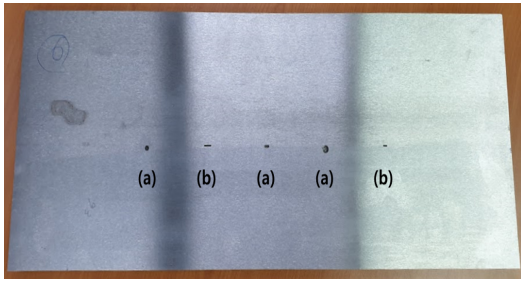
Weldment specimen with 2-class flaws
